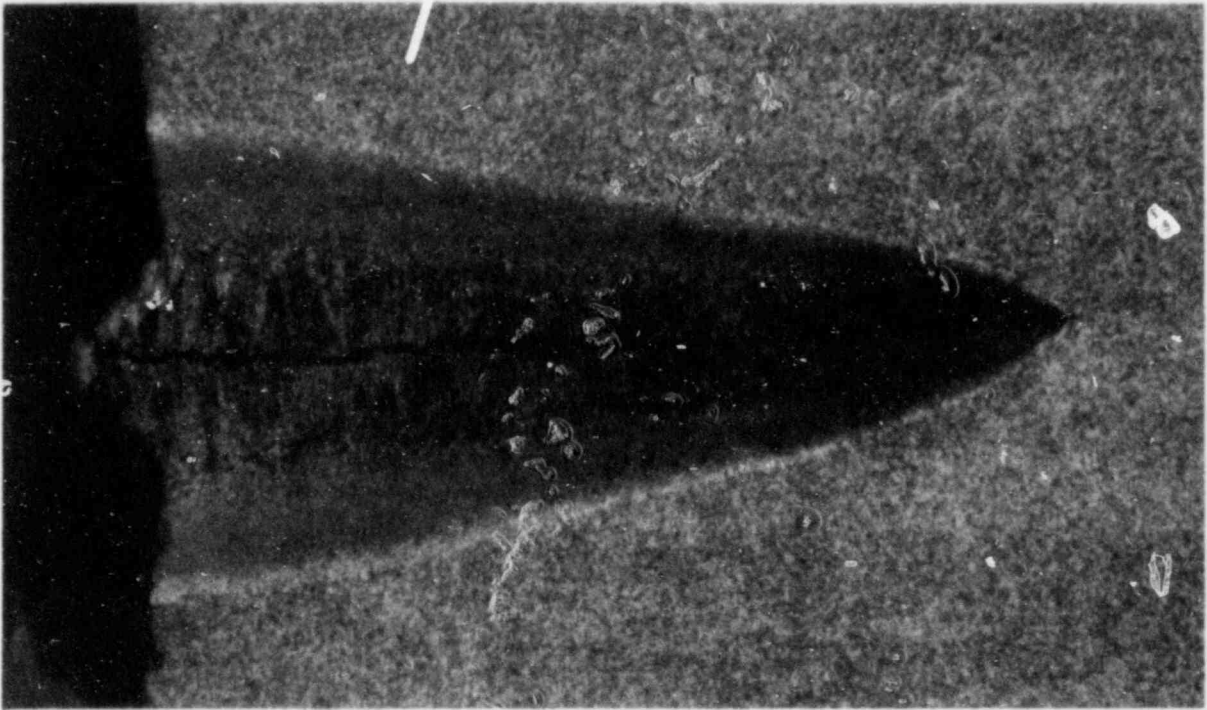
Cracked electron-beam weld in a piece of A 533 steel plate. The crack was produced by a hydrogen charging technique.
